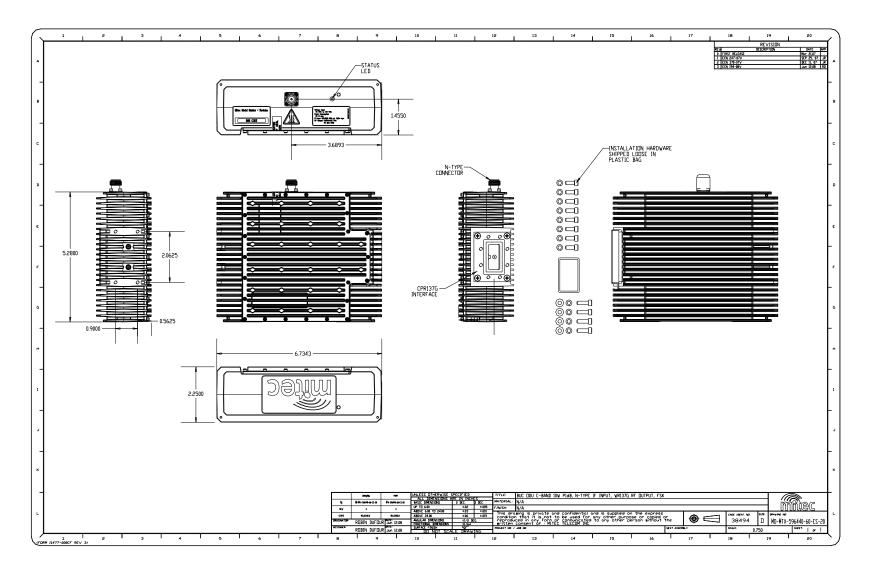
MTX-596x40-60-ES-20 - Outline drawing
